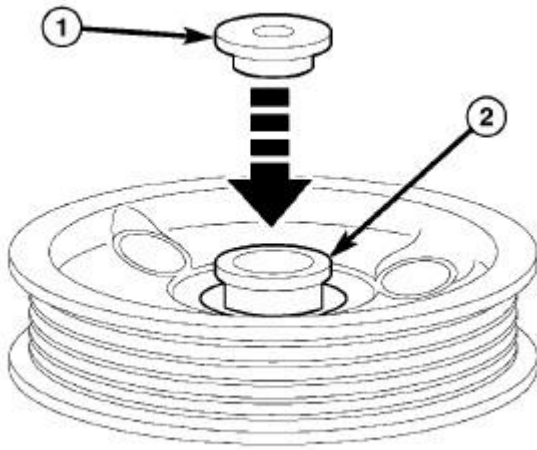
TOOL 9962 INSTALLED ON PULLEY
